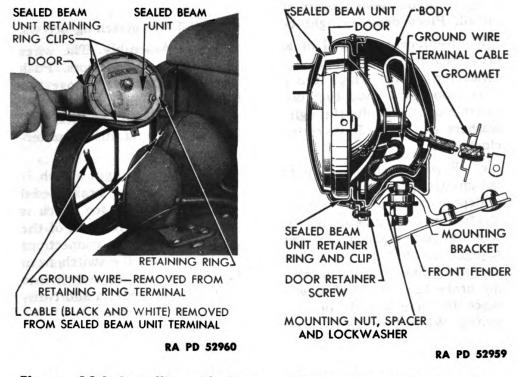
Installing Blackout Driving Light Sealed Beam Unit Figure 125—Blackout Driving Light
